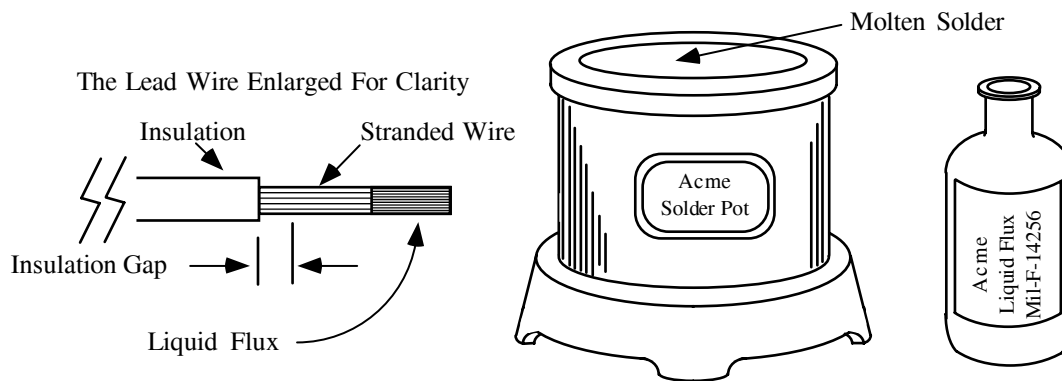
Using the Solder Pot to Tin Insulated Leads.
